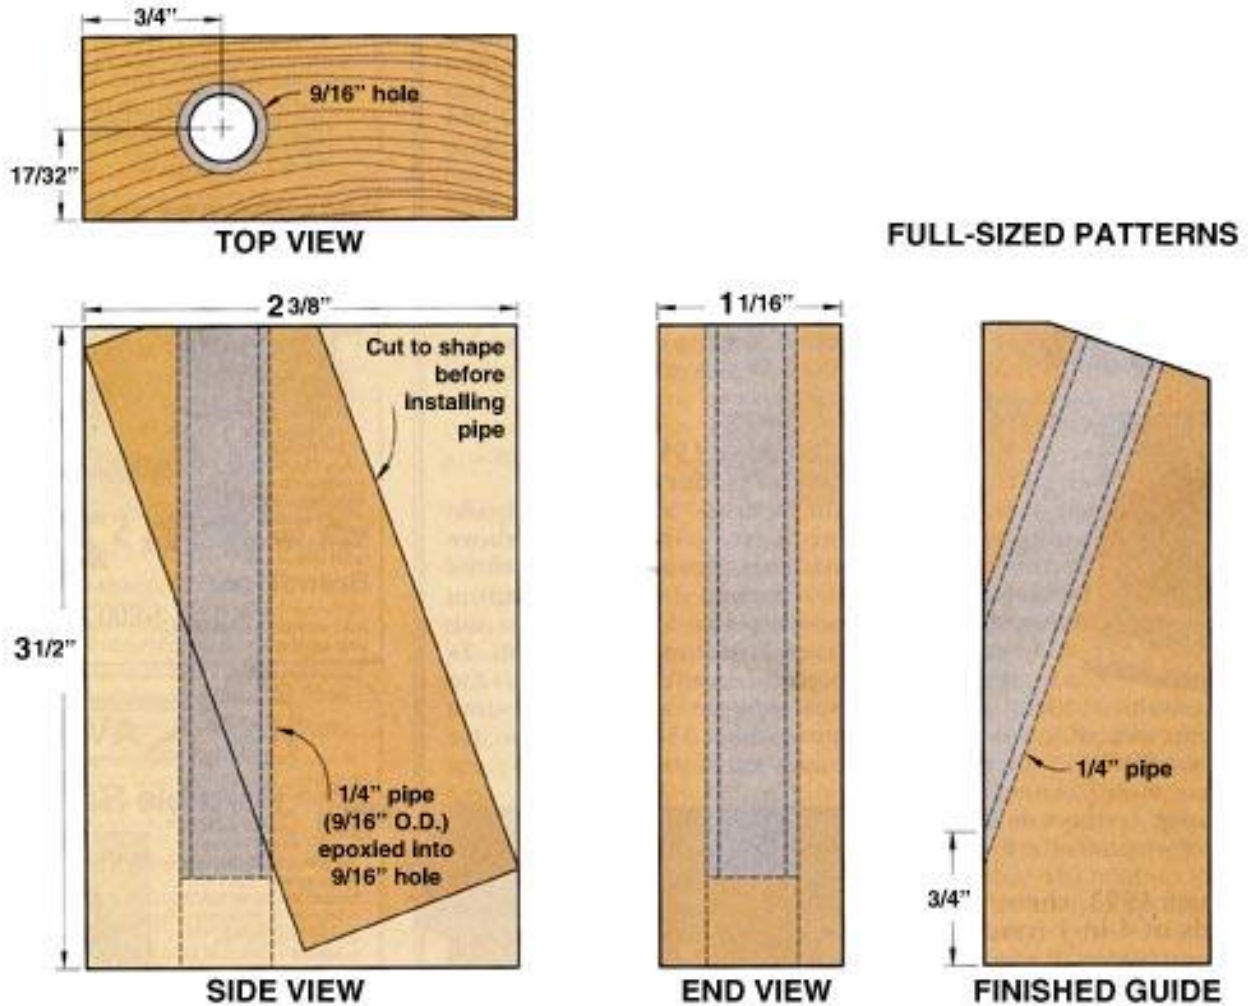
Wood Magazine Pocket-Hole Drilling Guide. Note that this drawing may not be to scale. Copy and resize the page so that the full size pattern matches the dimensions.
